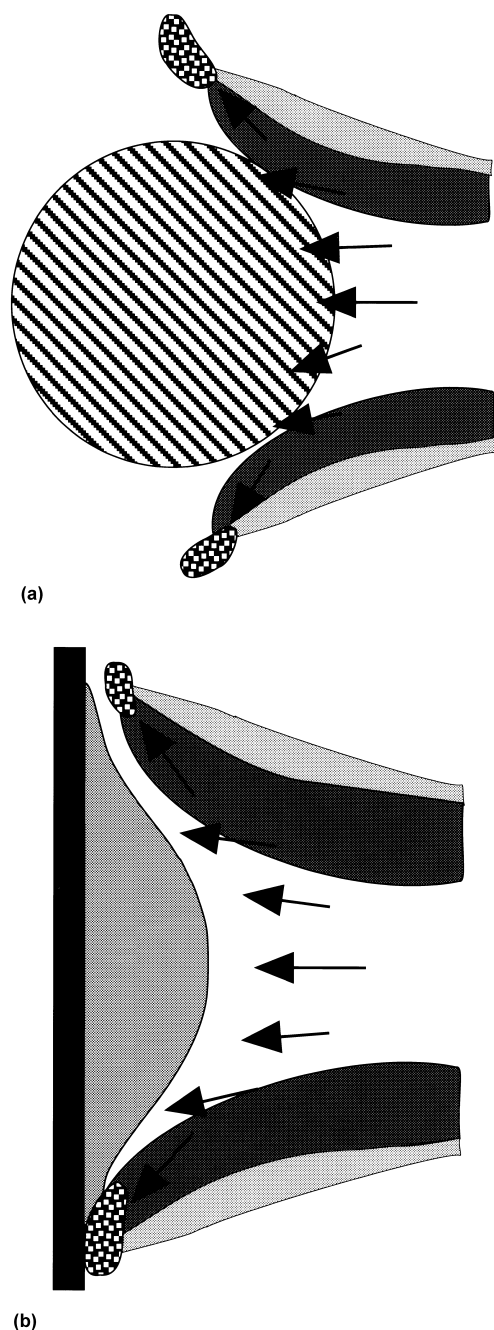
How part geometry affects coating deposition. A small target (a) has peripheral debris missing the substrate, while a larger target (b) collects all the peripheral debris and oxides.
